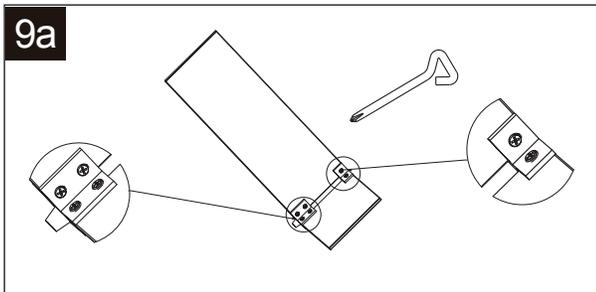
Using bolt driver (F) and screws (E), attach long glass to short glass using parts A, B, C and D as shown. Do not overtighten
